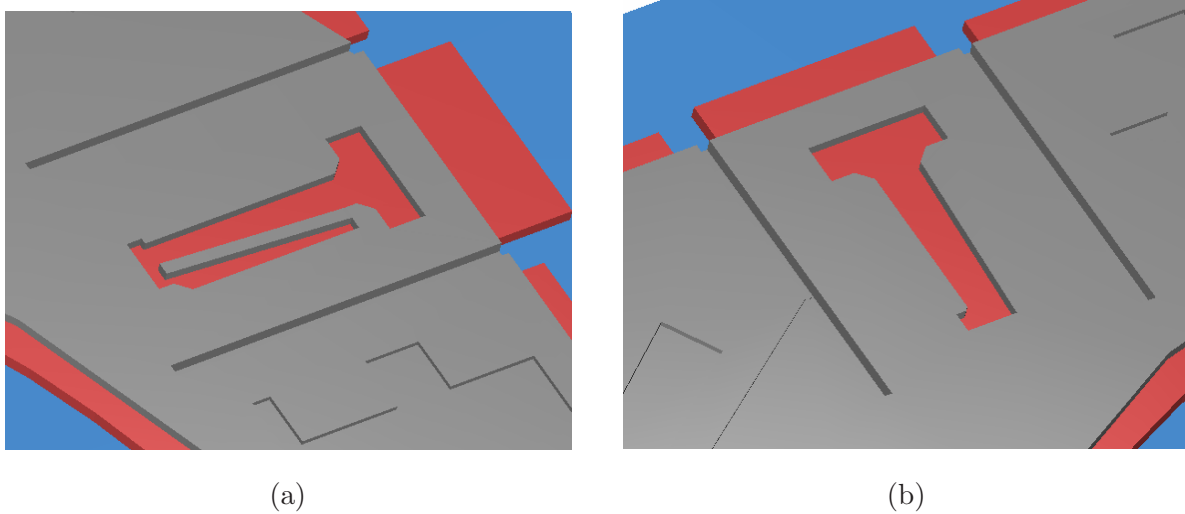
Schematic drawing of (a) Snap-key-lock and (b) modified key-lock joint used in further attempts to assemble the 3DRIM.
